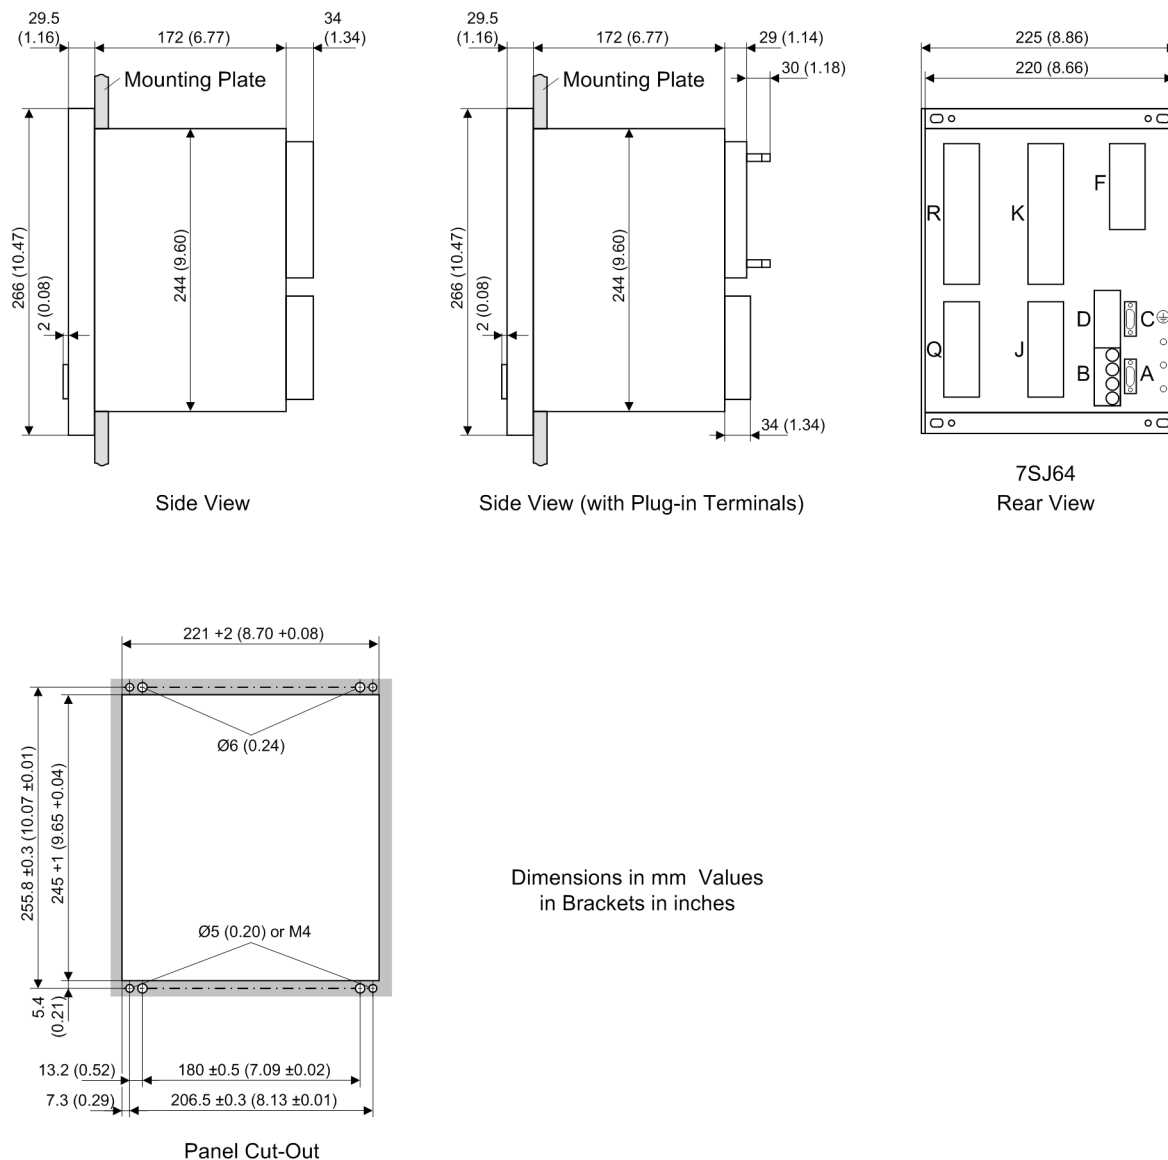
Dimensional drawing of a 7SJ64 for panel flush and cubicle mounting (housing size 1/2)
